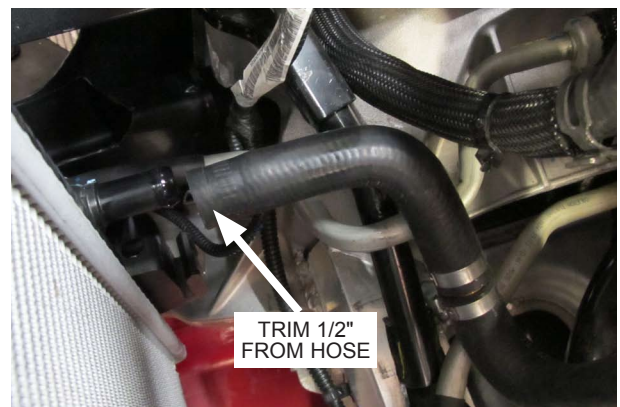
h: Trim 1/2" From 5/8 Coolant Hose
